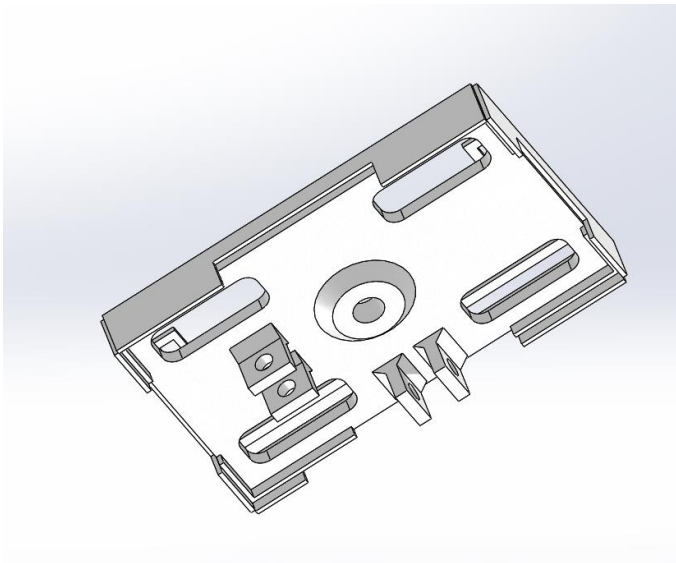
Revised CAD model of the plate with safety structures - bottom view
